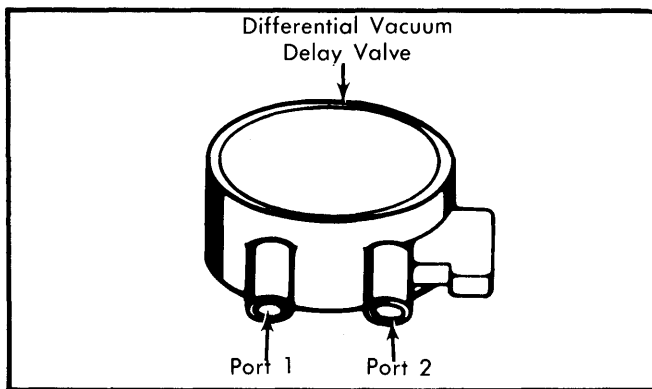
Location and Identification of Ports on Differential Vacuum Delay Valve
